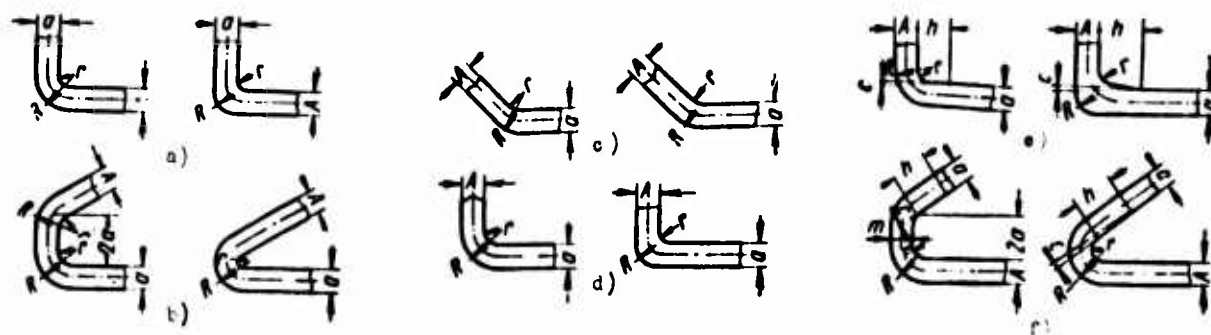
Construction of joints of two walls: recommended — on the left, permissible — on the right.
